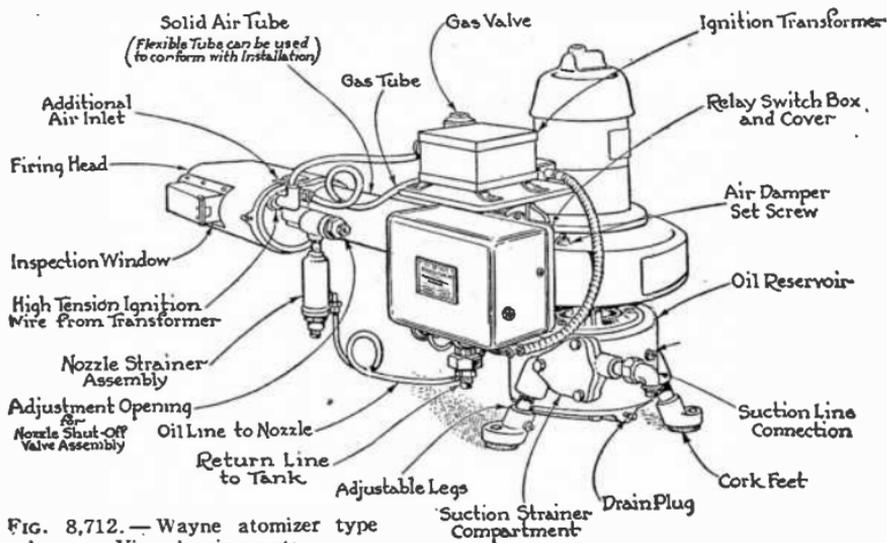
,712. — Wayne atomizer type burner. View showing parts.
